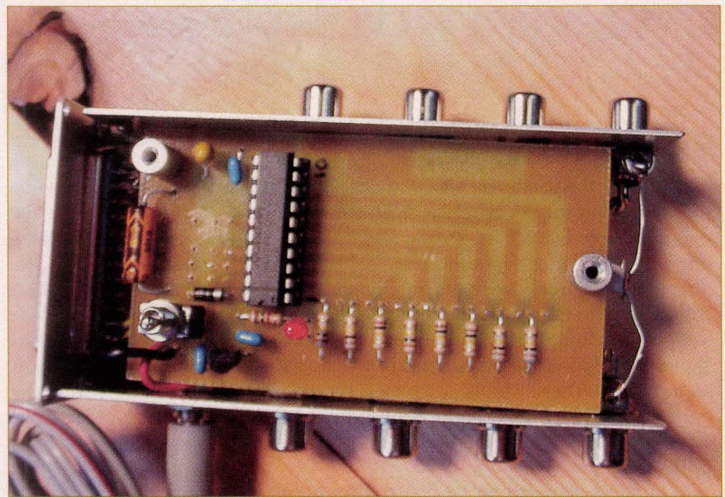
The eight-channel ADC built up on a printed circuit board and installed in a compact metal enclosure. The circuit is simple enough that it could be built on a small piece of protoboard instead.
